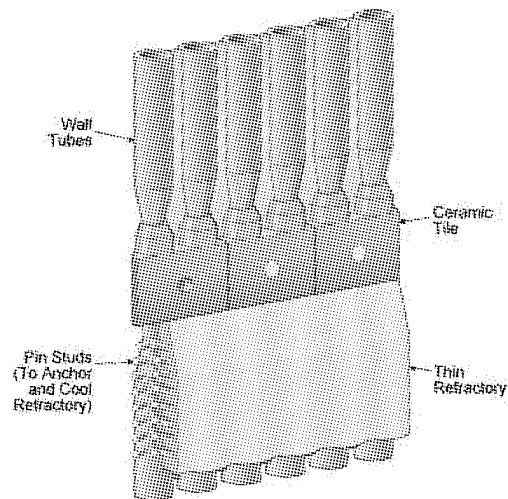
Reduced Diameter Zone (RDZ) design for erosion protection at the upper refractory edge
